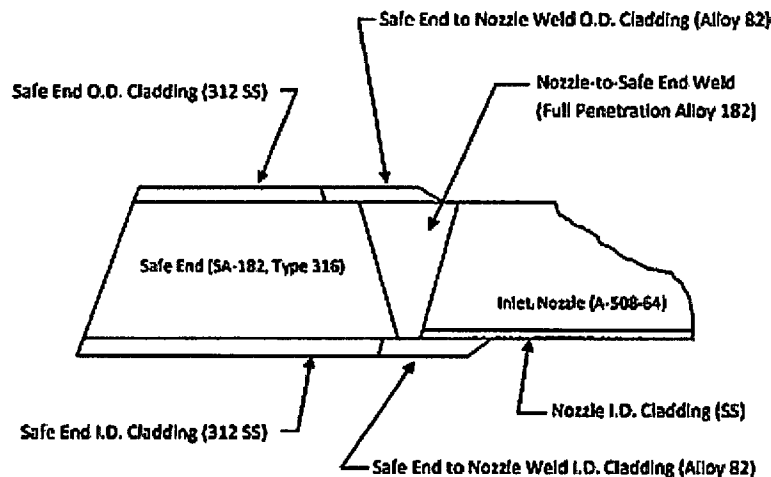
Inlet Nozzle to Safe-End Welds (Not to Scale)
